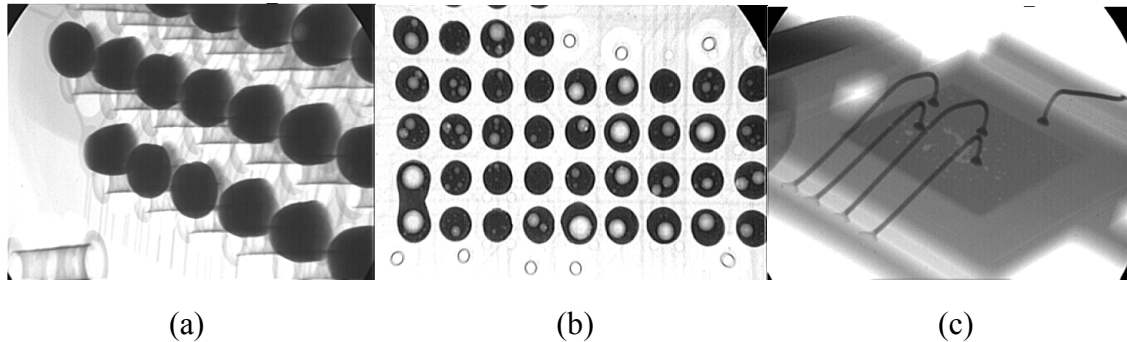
X-ray inspection of: (a) and (b) BGA packages; and (c) wire bond packages (all photos courtesy of X-Tek).
